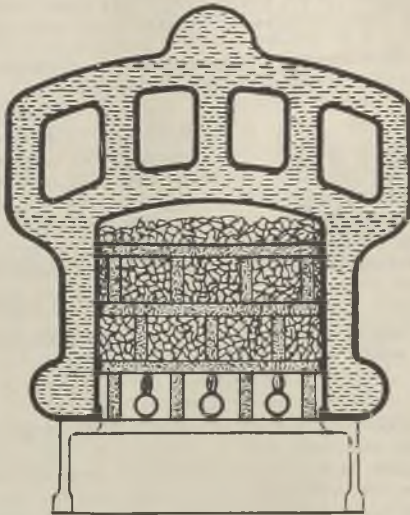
SECTION OF A BOILER ADAPTED FOR GASEOUS FIRING.
